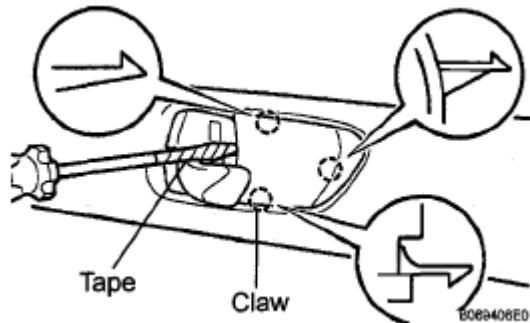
Disengaging Front Door Inside Handle Bezel Plug Claws
